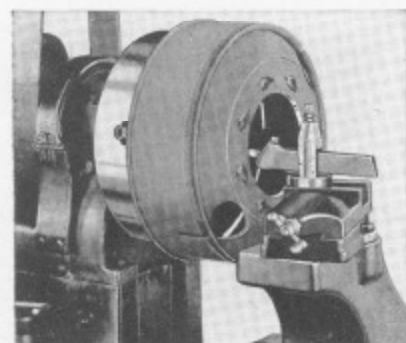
Boring a Hole in a Replacement Truck Wheel to Fit the Old Hub.
